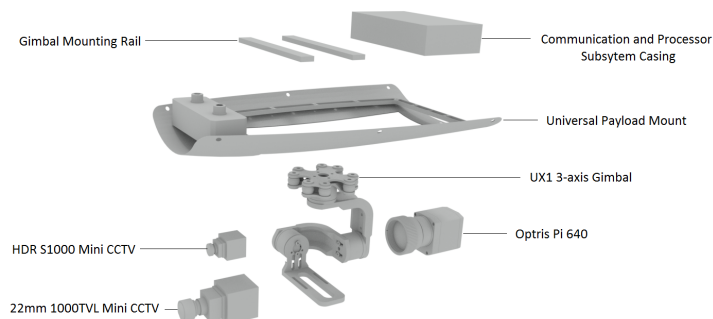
Exploded View of Universal Payload Mount and Subsystems
